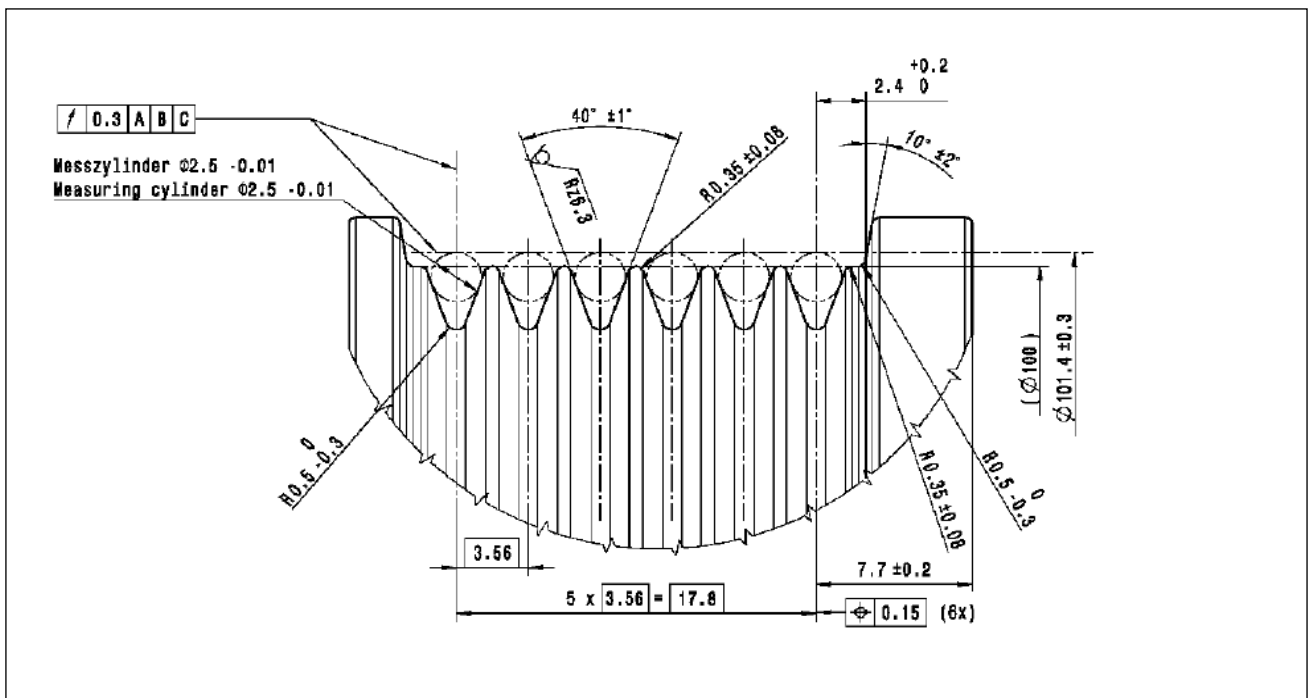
Drive pulley for air conditioner compressor Denso 7SU17 (7E0.820.803) (detail U)
